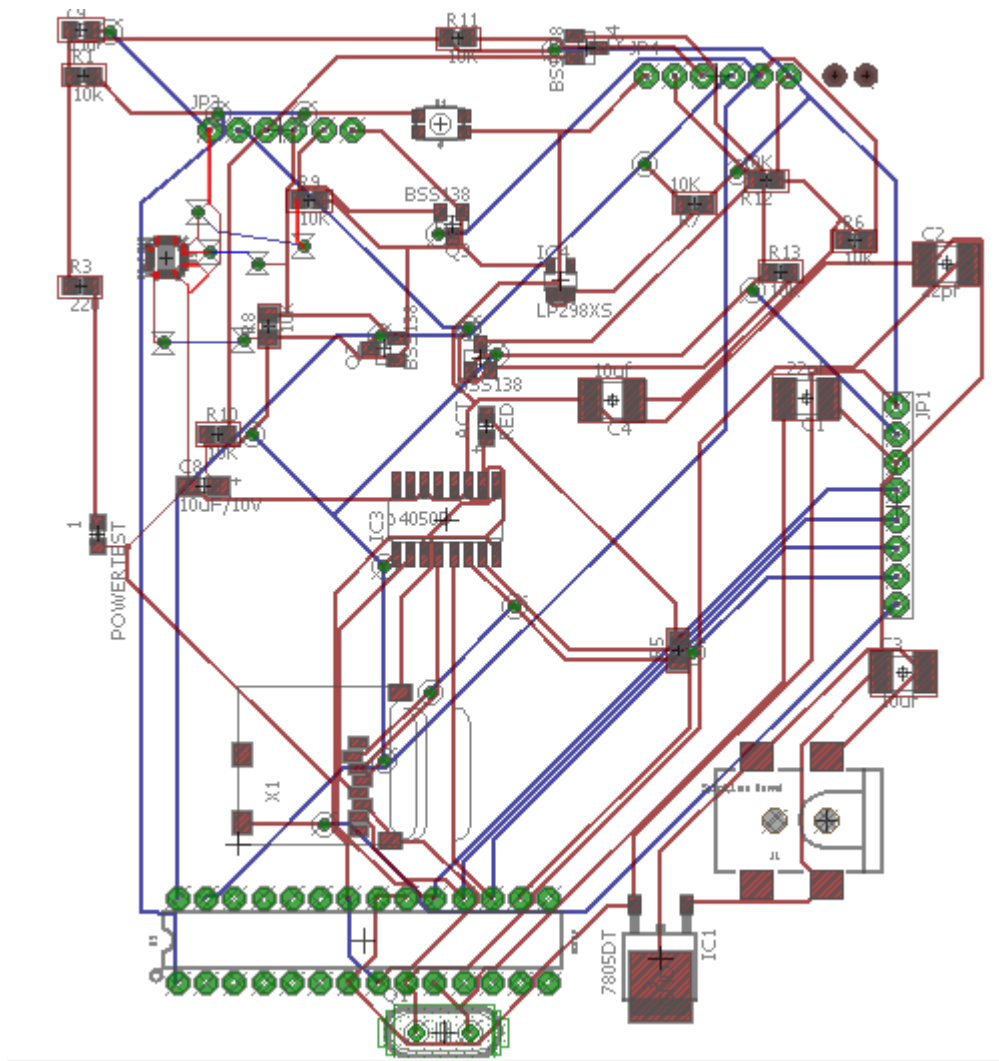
Printed Circuit Board Layout, Black Box Rev. 01
